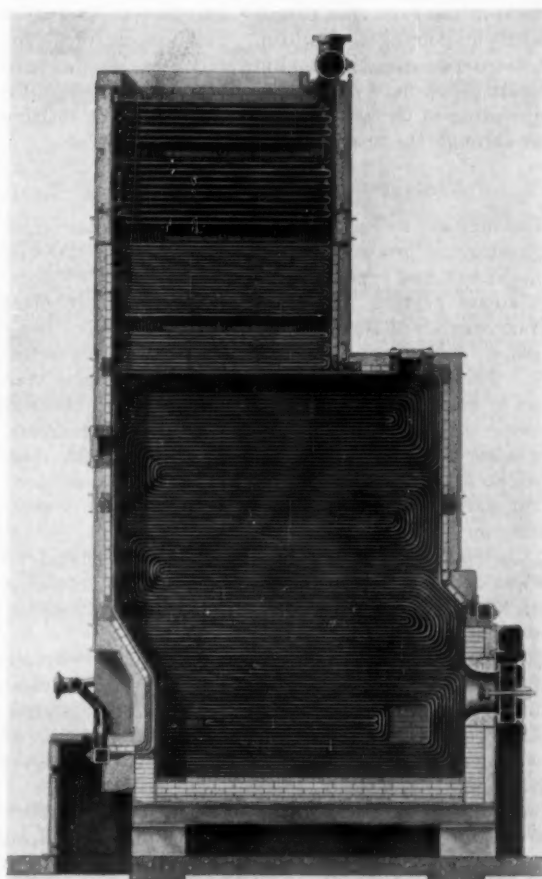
Sectional view of a boiler designed for oil or gas firing. Air cooled furnace floor provides for alternate arrangement with a stoker
